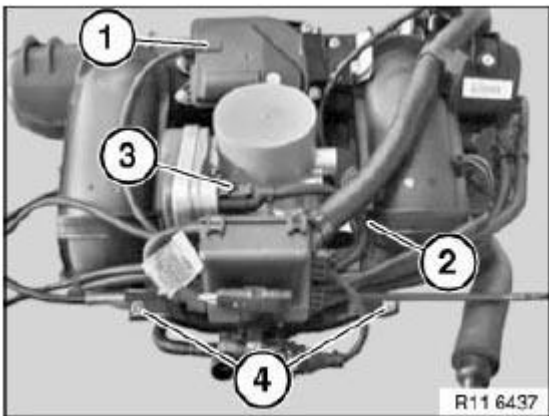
Crankcase Breathers, Plug Connection And Holder
